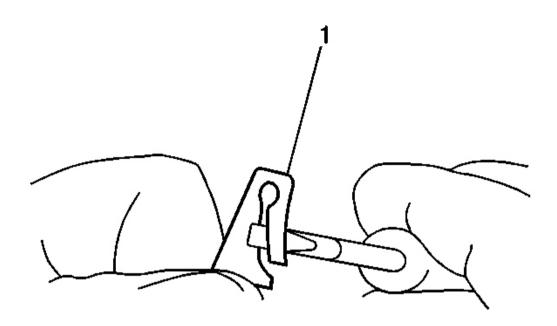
Aligning Locking Device Courtesy of GENERAL MOTORS CORP.
